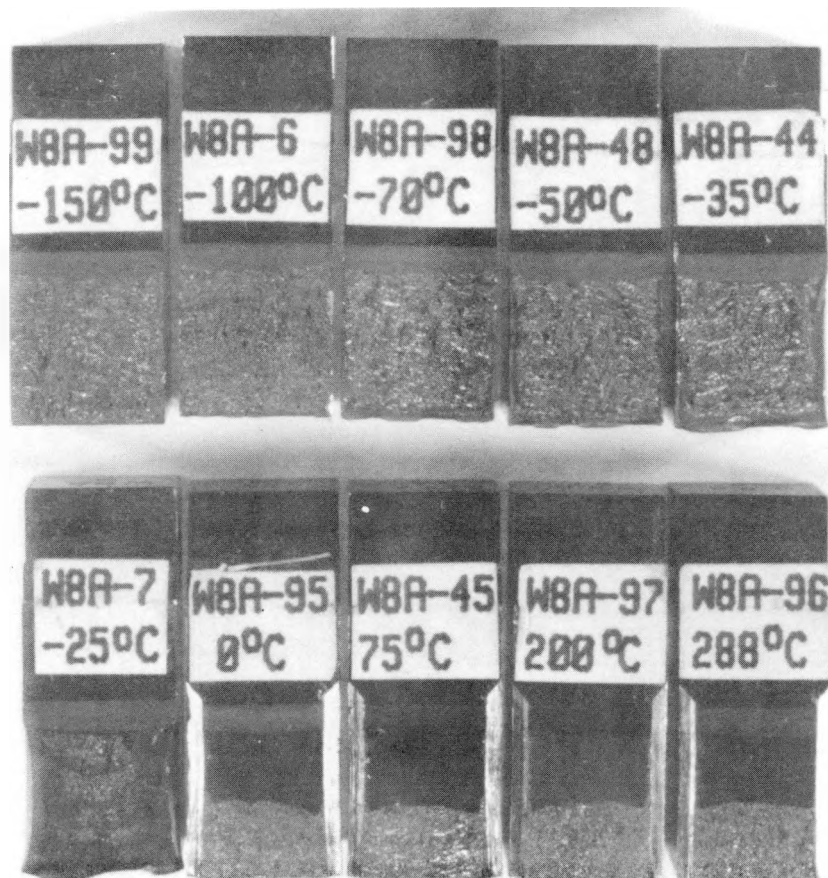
Fracture surfaces for the Linde 80 weld (W8A), in the unirradiated condition.
